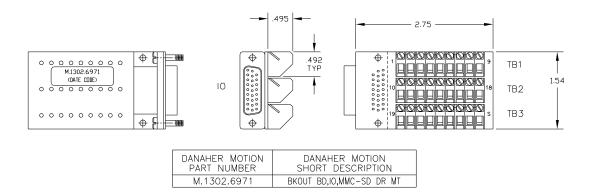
Drive I/O Port Breakout Box Dimensions
